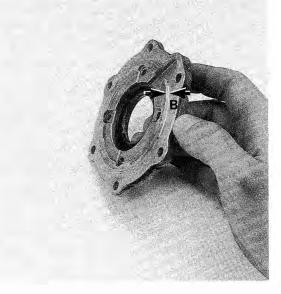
Clutch guide sleeve protrusion height (dimension B).
